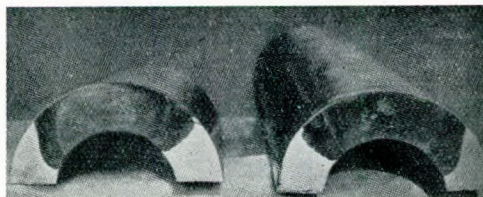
Cr V steel. Piston rod fractured surfaces.
